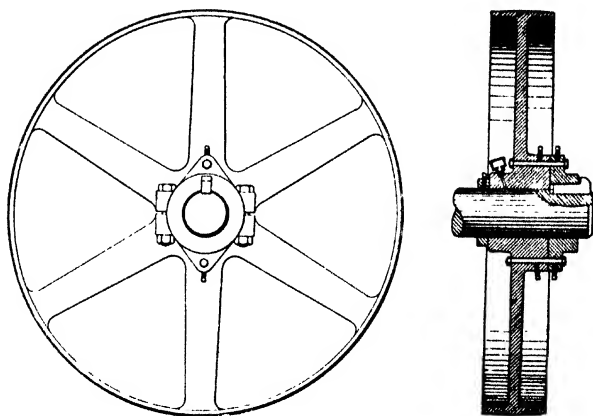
Safety driving pulley with shearing bolts. Elevation and section.
